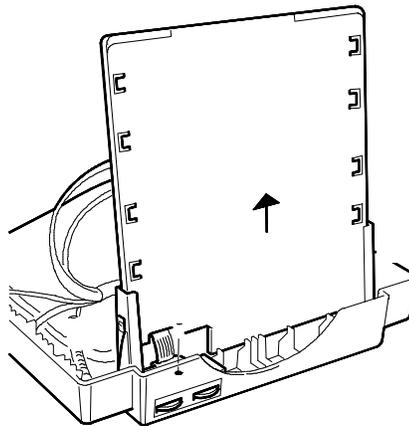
Removal of the Metal Protection Panel from the Solder Side of the Main Board
